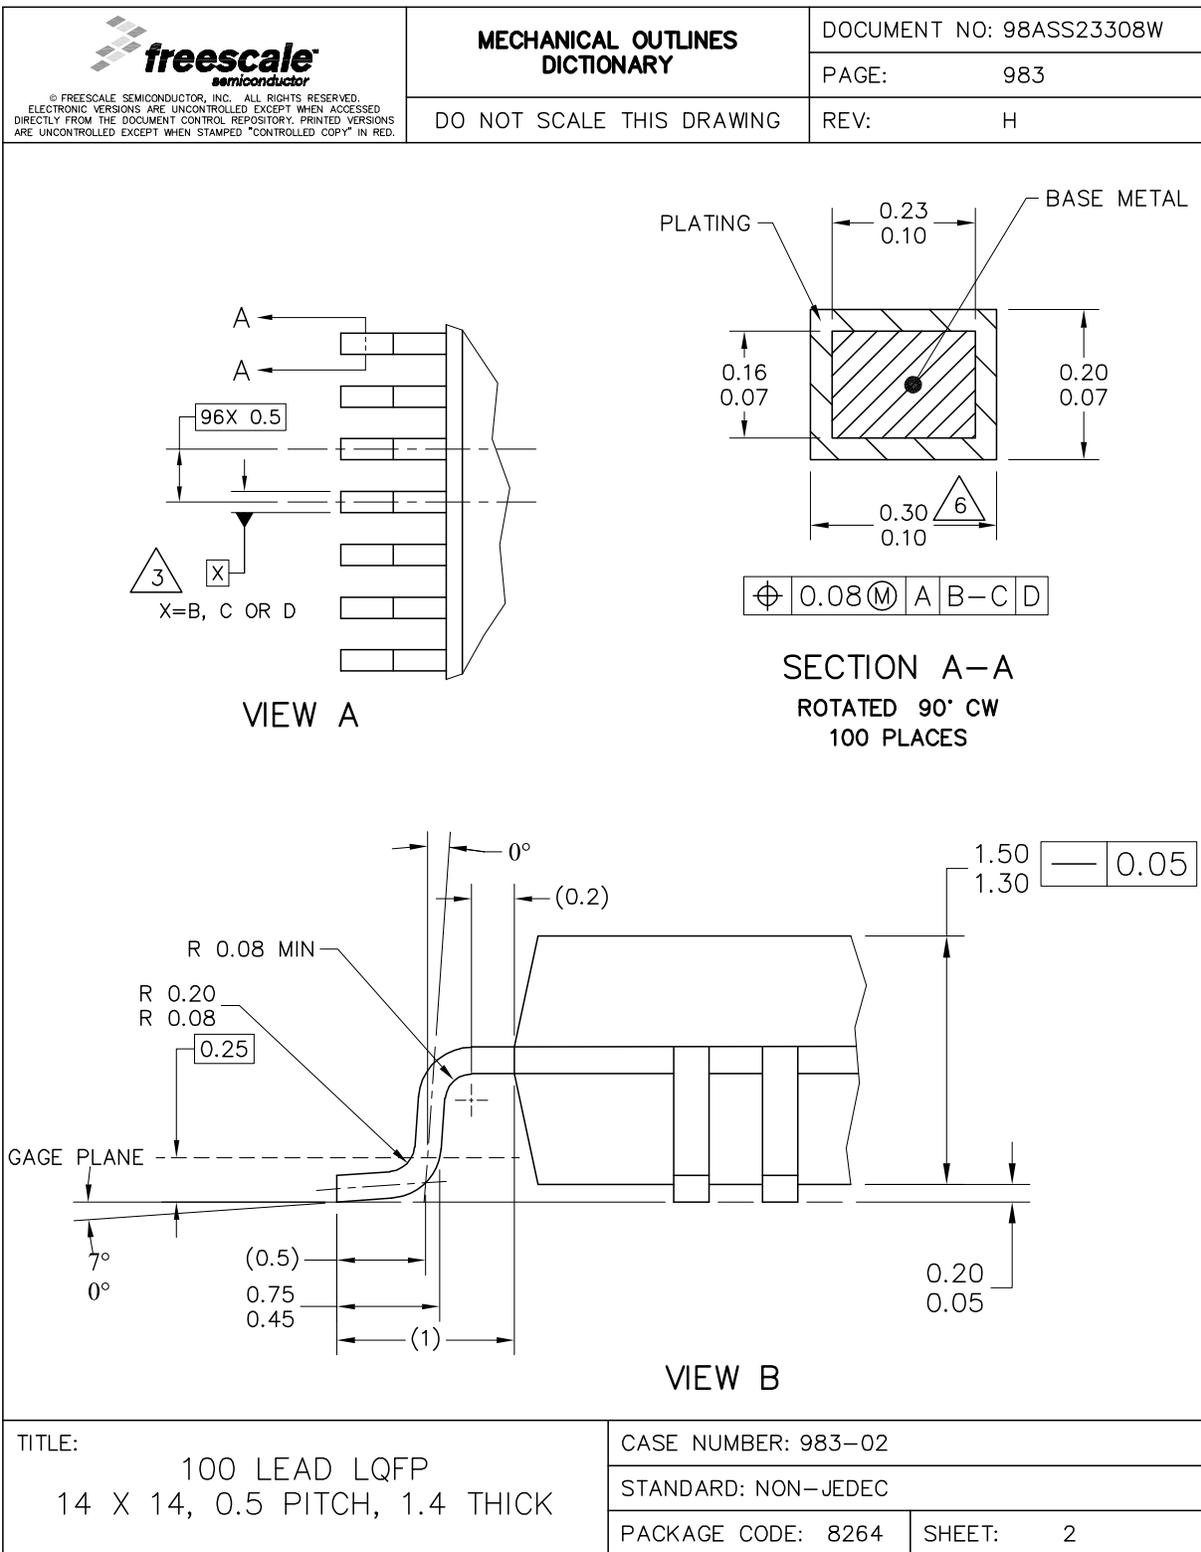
100 LQFP package mechanical drawing (Part 2 of 3)
